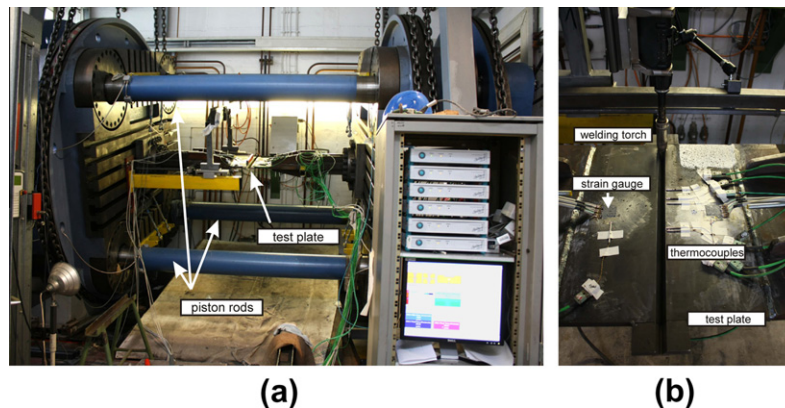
Experimental set-up; (a) 16 MN large scale testing facility for component weld testing and simulation (GAPSI 16) with test plate indicated and (b) close-up of a test plate equipped with strain gauges and thermocouples; plate dimensions 500 mm × 400 mm × 20 mm; material: S355J2 + N.
